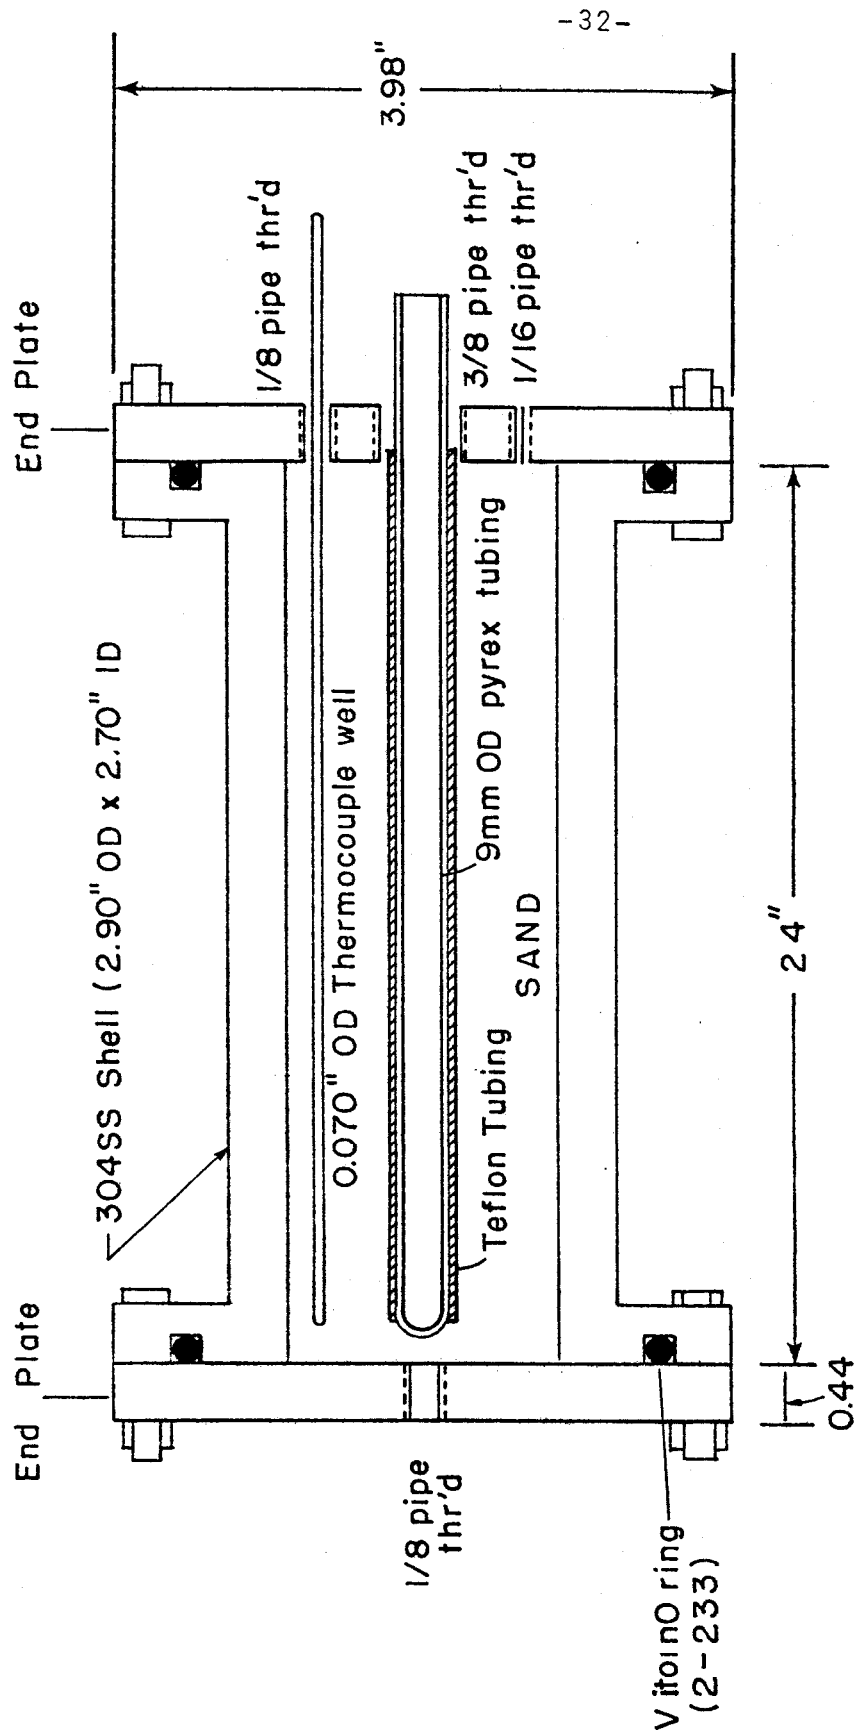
CORE HOLDER FOR UNCONSOLIDATED SAND PACK
